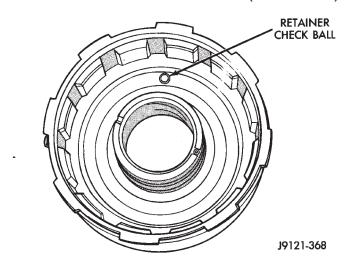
Front Clutch Piston Retainer Check Ball Location
